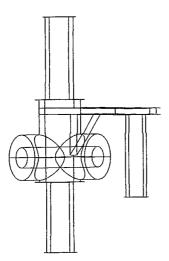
Typical Isometric drawing of tyre-to-shaft
